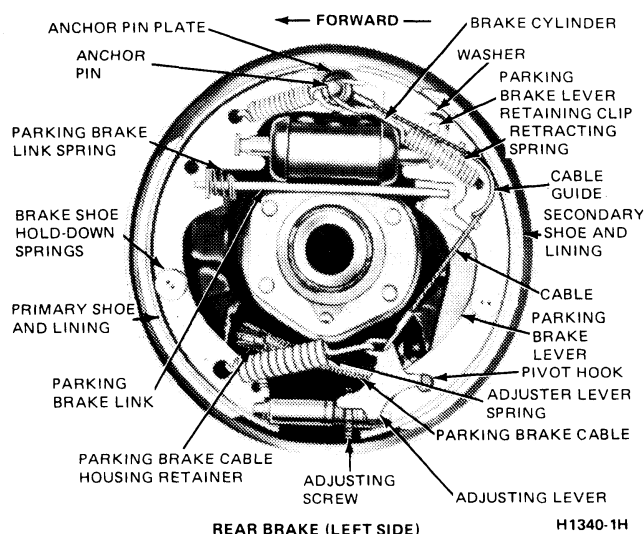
Self Adjusting Brake Assemblies Standard—E-100, E-150, F-100, F-150, F-150 (4x4) and Bronco
